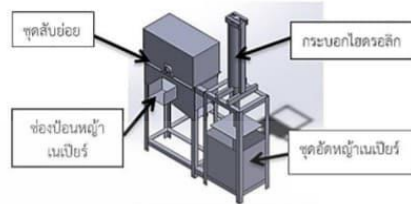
Engineering drawing of animal feed shredding and compressing machine.
